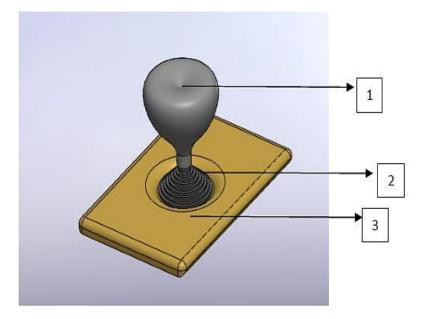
3D Joystick model: 1- Joystick knob; 2- Rubber Joint; 3- Plastic support
